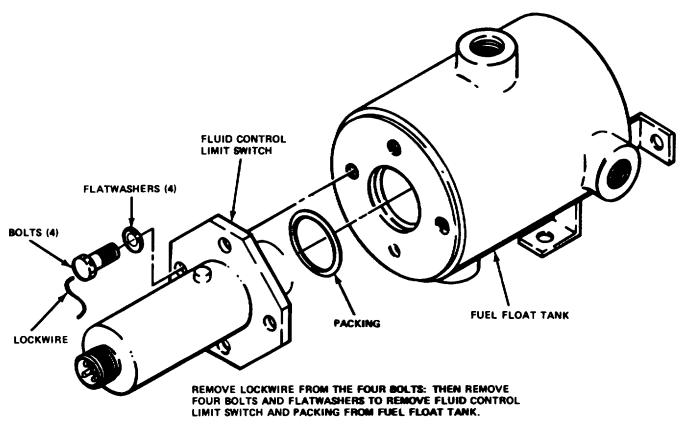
Engine and Skid Assembly Component Replacement (TS 6115-50-12 4-34). Change 6 4-81
